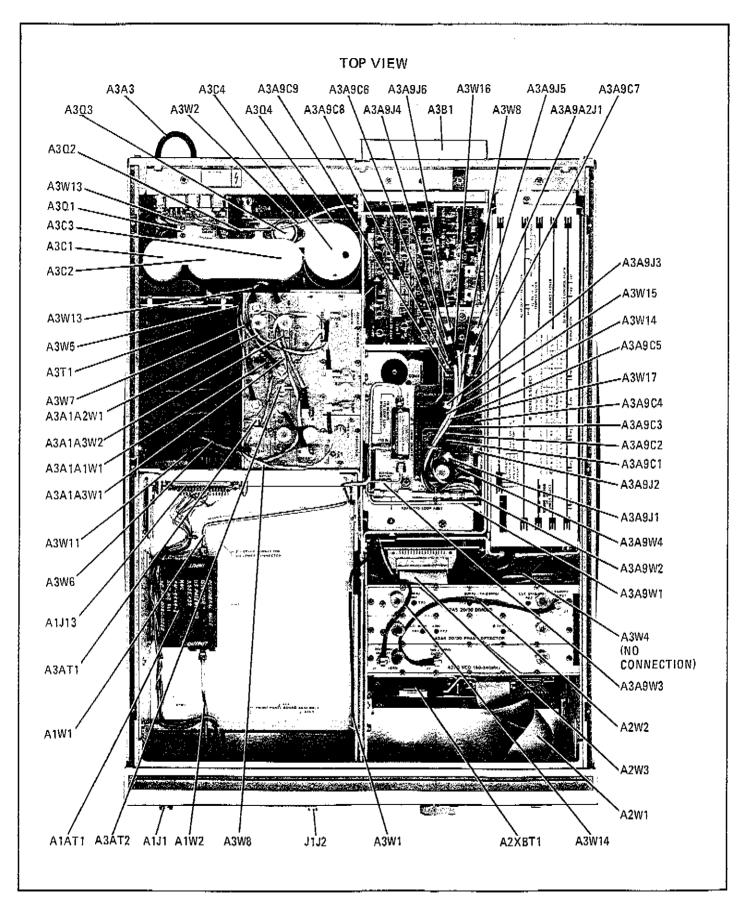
Top View Chassis Mounted Parts and Assembly Locations
